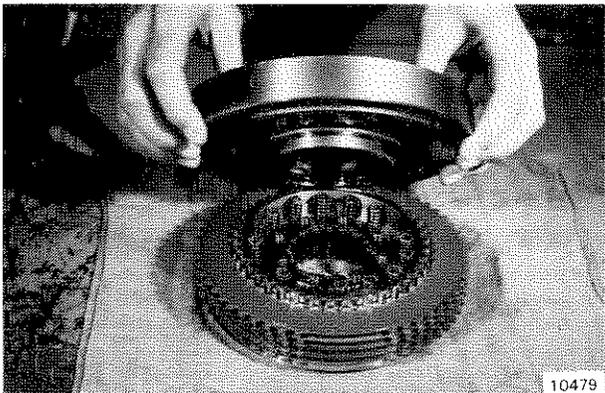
ASSEMBLY OF THE CLUTCHES (Page 1 of 3)
